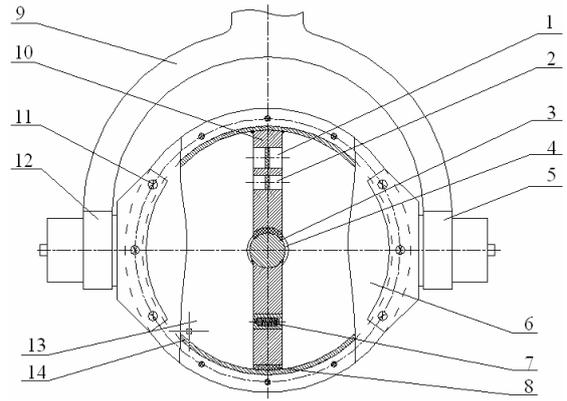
Scheme of loading unit: 1- rough regulation hole; 2-smooth regulation hole; 3- axle; 4- bearing; 5- bearing; 6- frame; 7- valve; 8- gasket; 9- handle; 10- diaphragm; 11- screw; 12- bearing; 13- oil; 14- gasket
